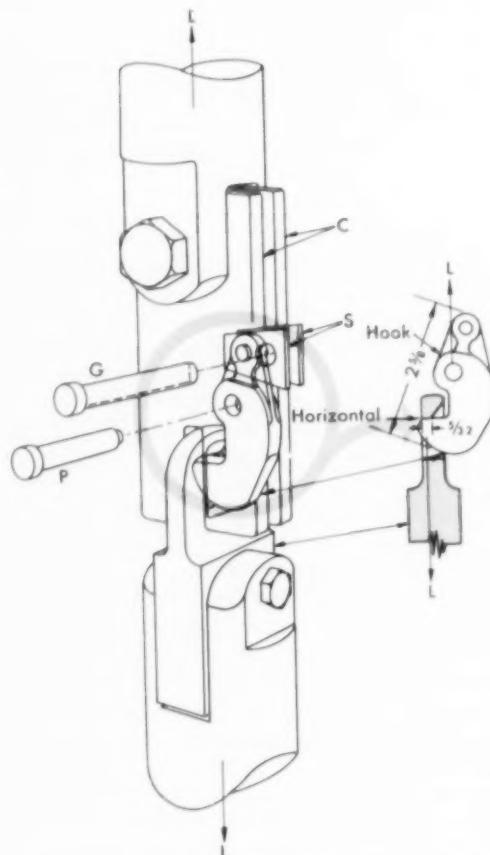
Assembly for Prestressing Bomb Shackle Hook in a Standard Tensile Testing Machine
